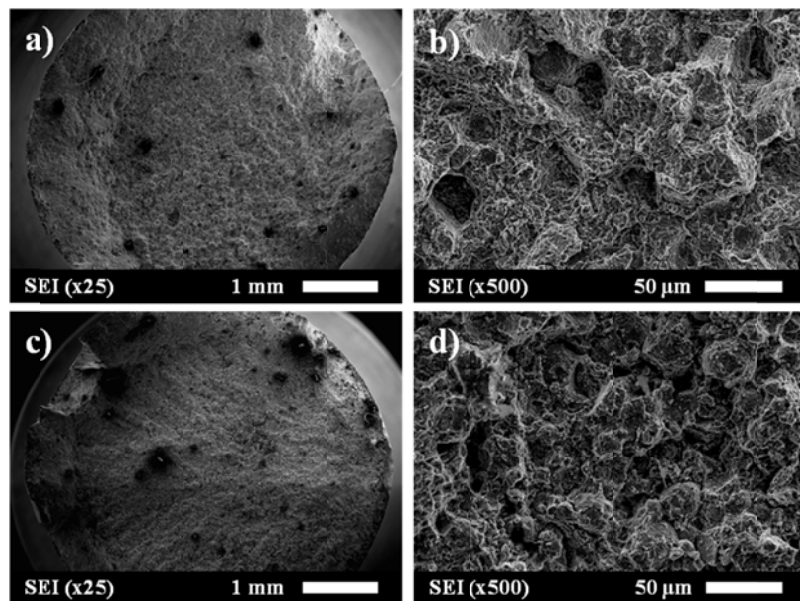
Fracture surfaces from the ET tensile tests for the sieved powders. The S_C powder (a,b) exhibited the best ductility in the current work resulting in (a) fracture surfaces with large shear lips ductile and (b) transgranular fracture. The S_F powder (c,d) exhibited (c) much bigger shear lips than the unsieved fine powder, and (d) much more ductile fracture surface showing microvoid coalescence and free from PPBs.
